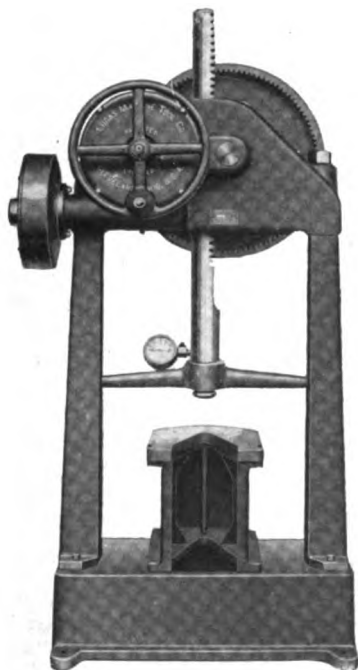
Standard 30-Ton (27t.) Press. Belt Drive With Base Above Floor.
